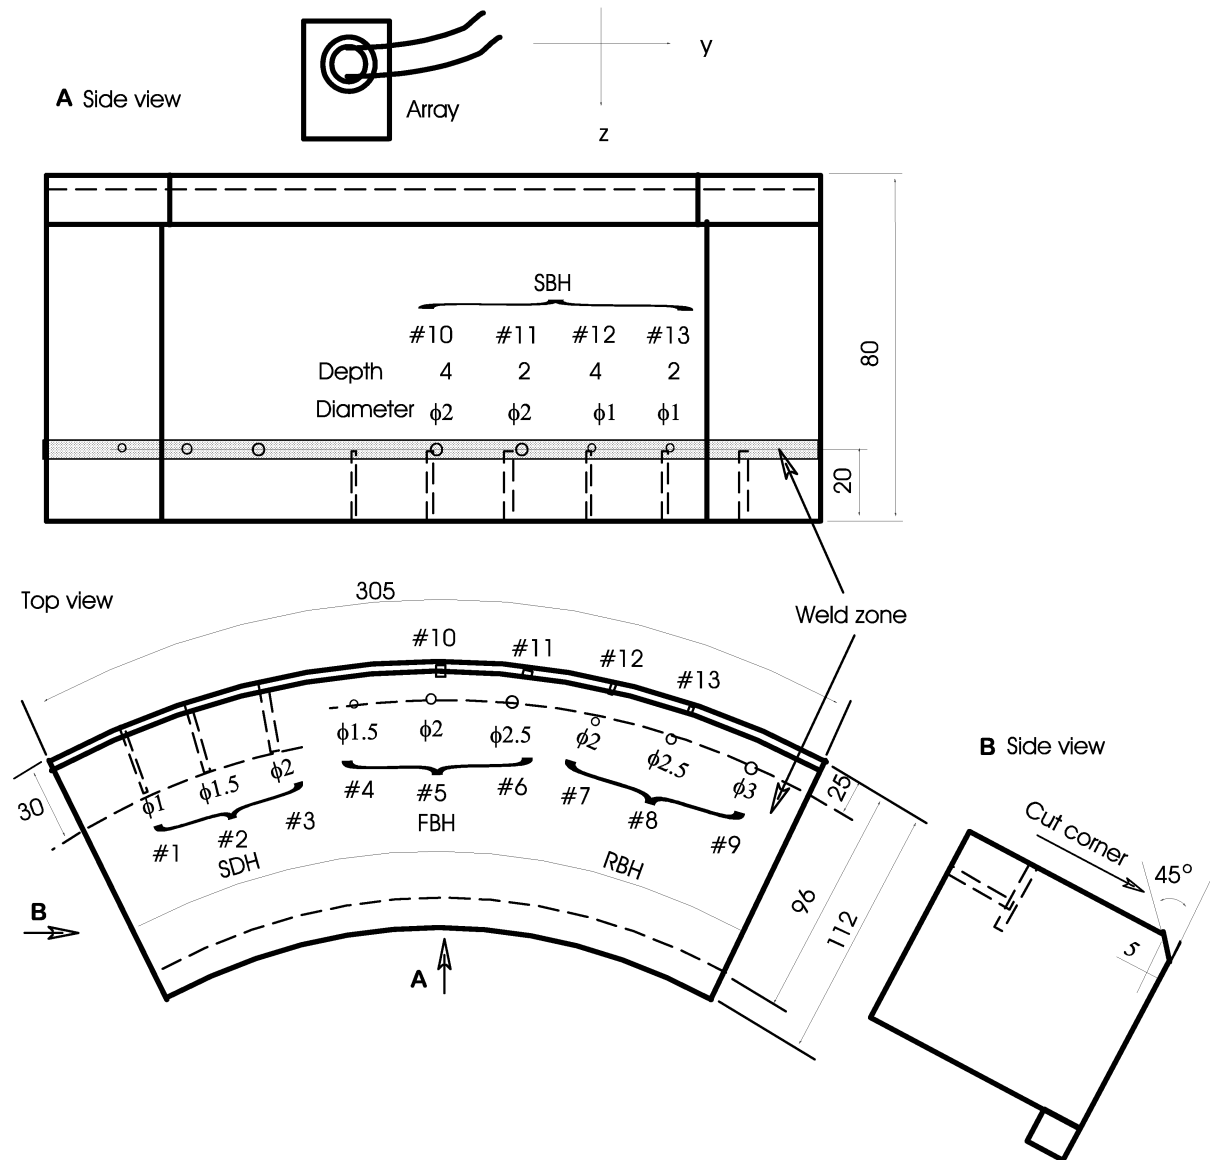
Schematic of the copper canister CAN1 and the array for inspection of the weld in the canister.
